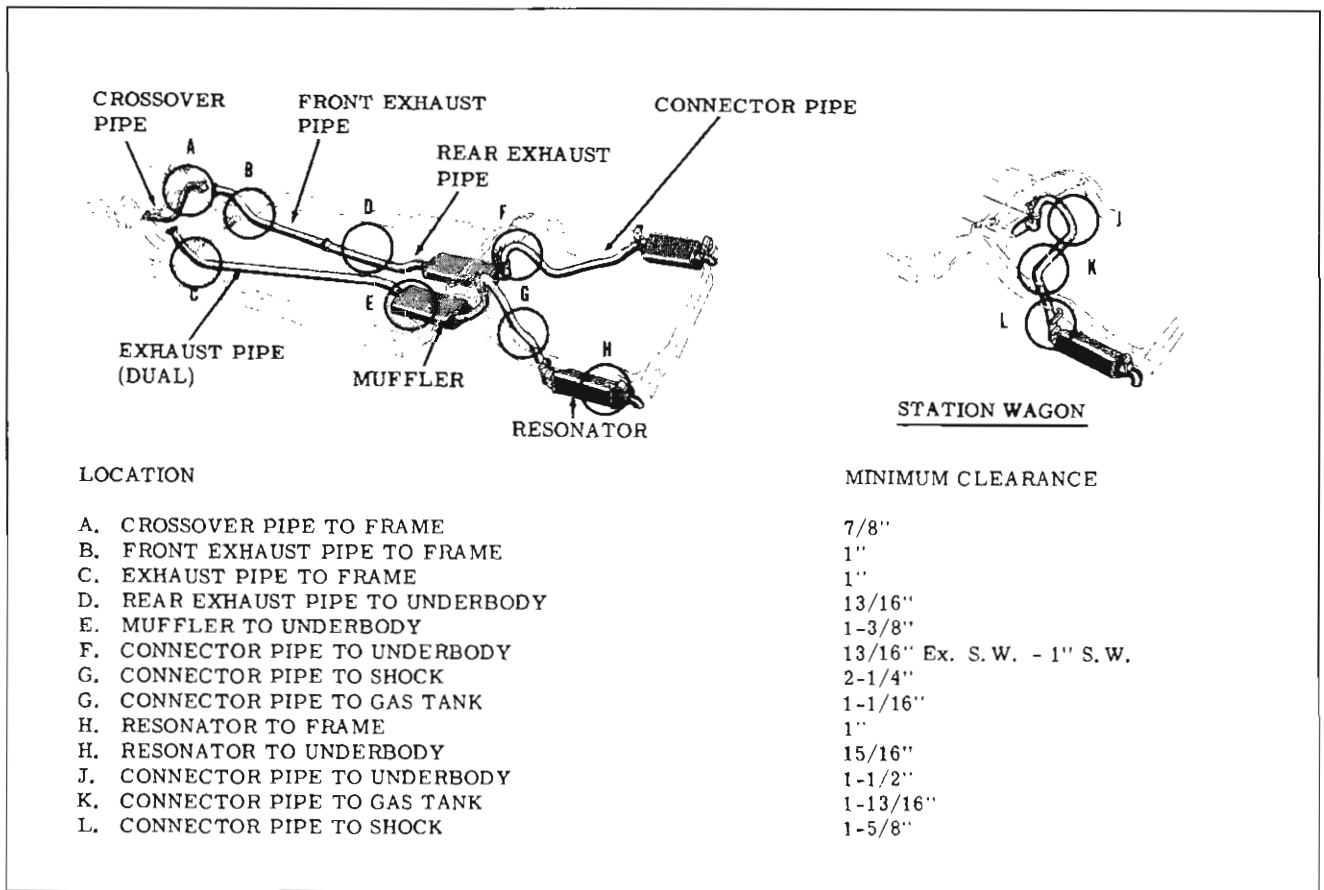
Clearance Specifications for Exhaust System Parts
